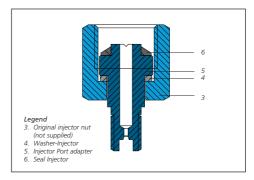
Image of the Injector showing the SilTite™ FingerTite injector adapter assembly
